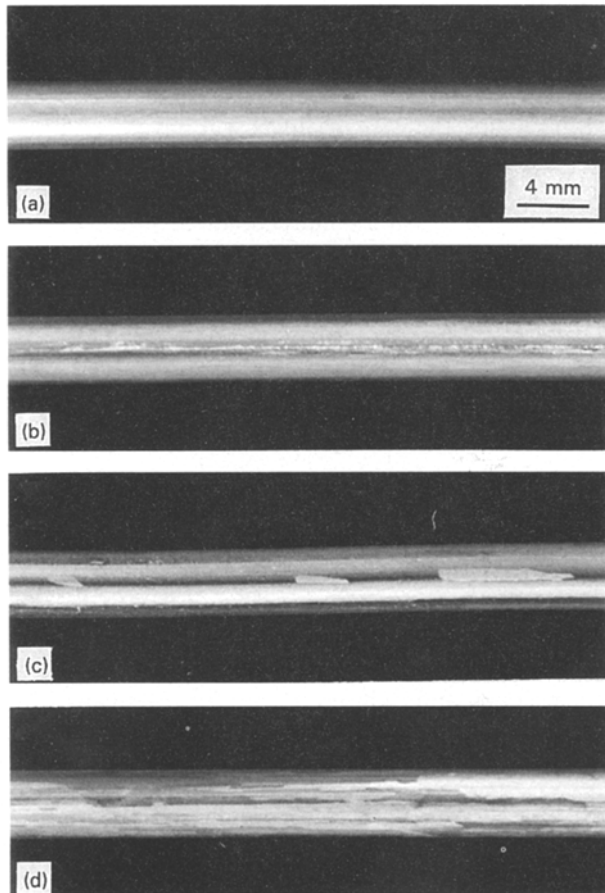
Cast surface structure of the wire specimens after etching with a nitric acid solution. Casting speed: (a) 40, (b) 50, (c) 60, and (d) 120 mm min⁻¹. The control temperature was 1117°C and the mould-cooler distance was 33 mm.
